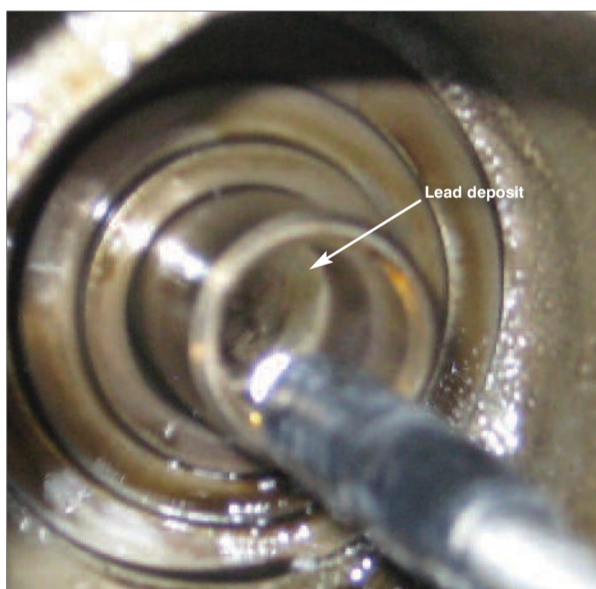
Lead deposit build-up in Lycoming exhaust valve guide. (Light part). Courtesy Jerry Olson
